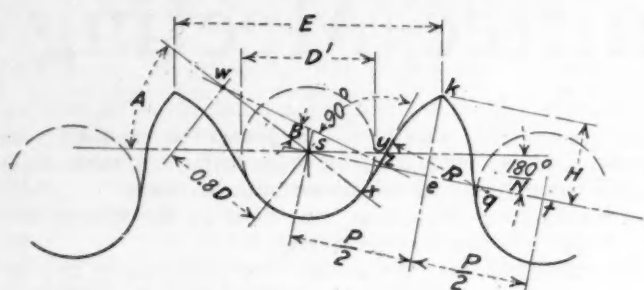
ROLLER-CHAIN SPROCKET TOOTH-FORM
